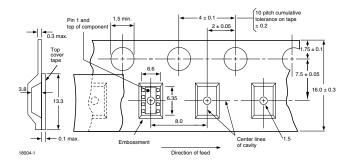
Tape Dimensions, 2000 Parts per Reel
